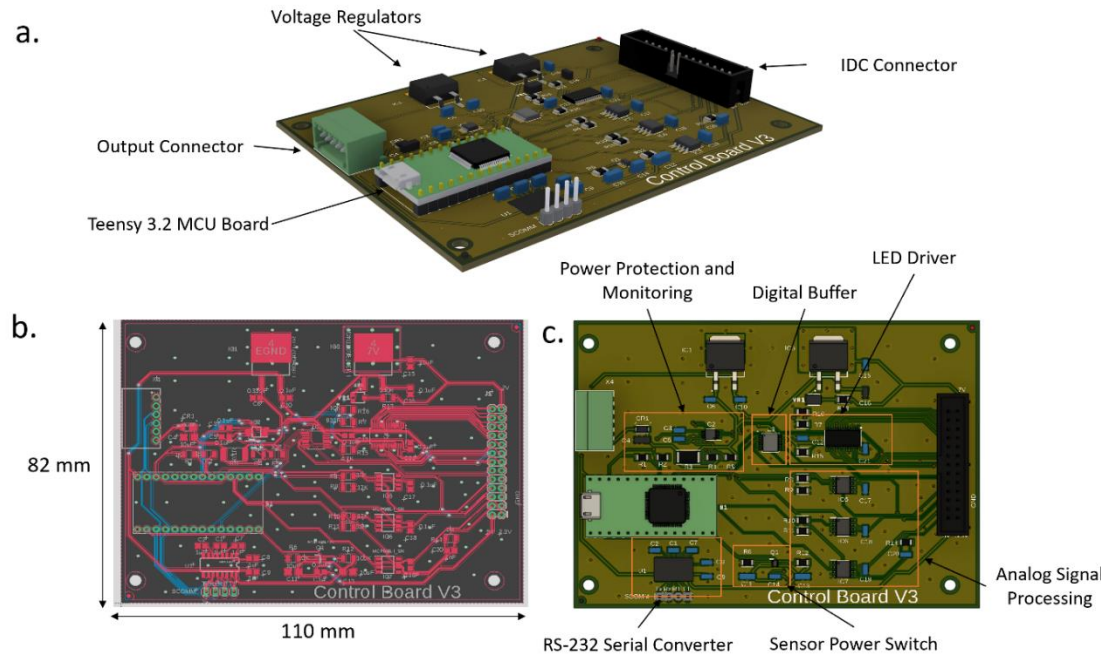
Design layout of the control board printed circuit board (PCB). (a) 3D labelled model view of the control board design. (b) Dimensioned PCB layout top layer view showing layout, component placement, trace routing and copper power planes. (c) 3D labelled model top view of PCB showing circuitry blocks for functionality of the system.
